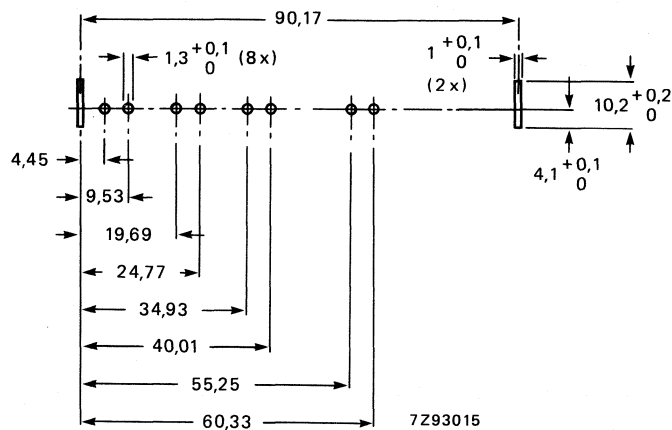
Piercing diagram viewed from solder side of board. Unless otherwise stated the tolerance is $\pm 0,05$ mm.
